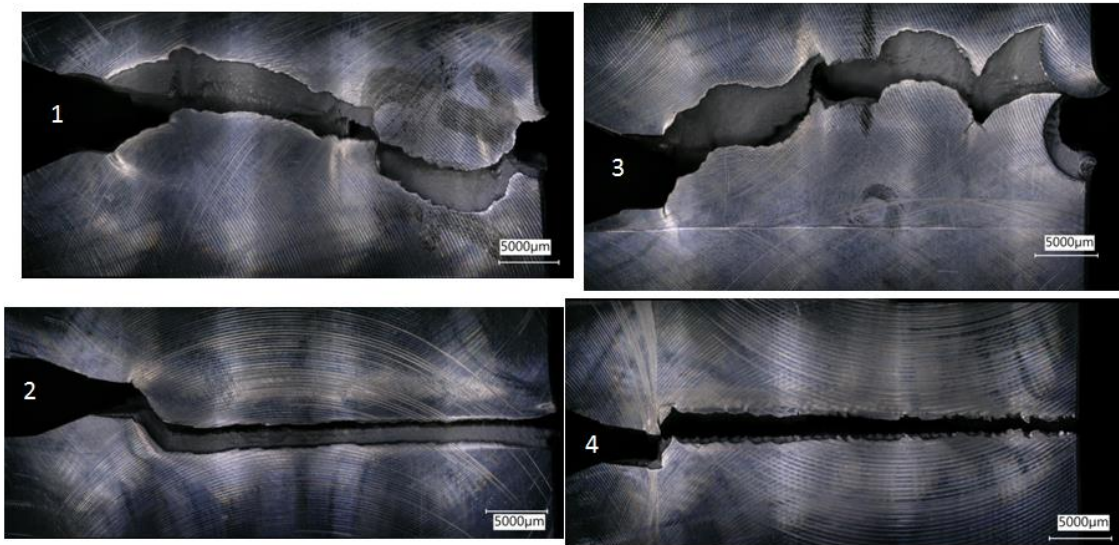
Fracture appearance of thinner/faster/T3 build from side view
